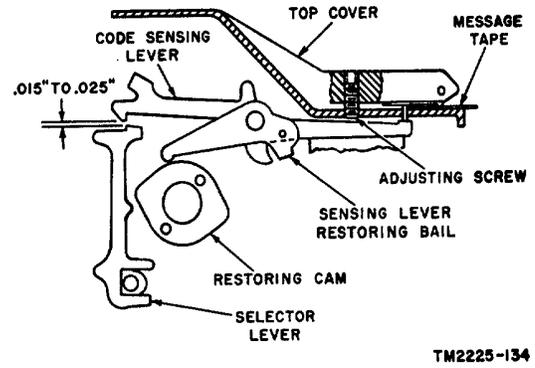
Selector lever and code sensing lever clearance adjustment.
